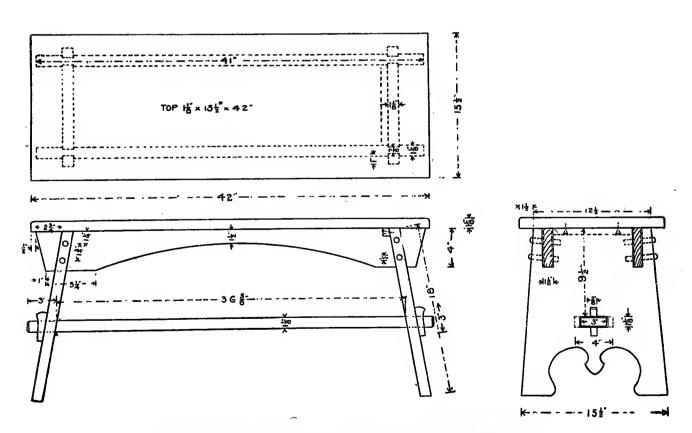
A—HOW TO MAKE A PIANO BENCH
